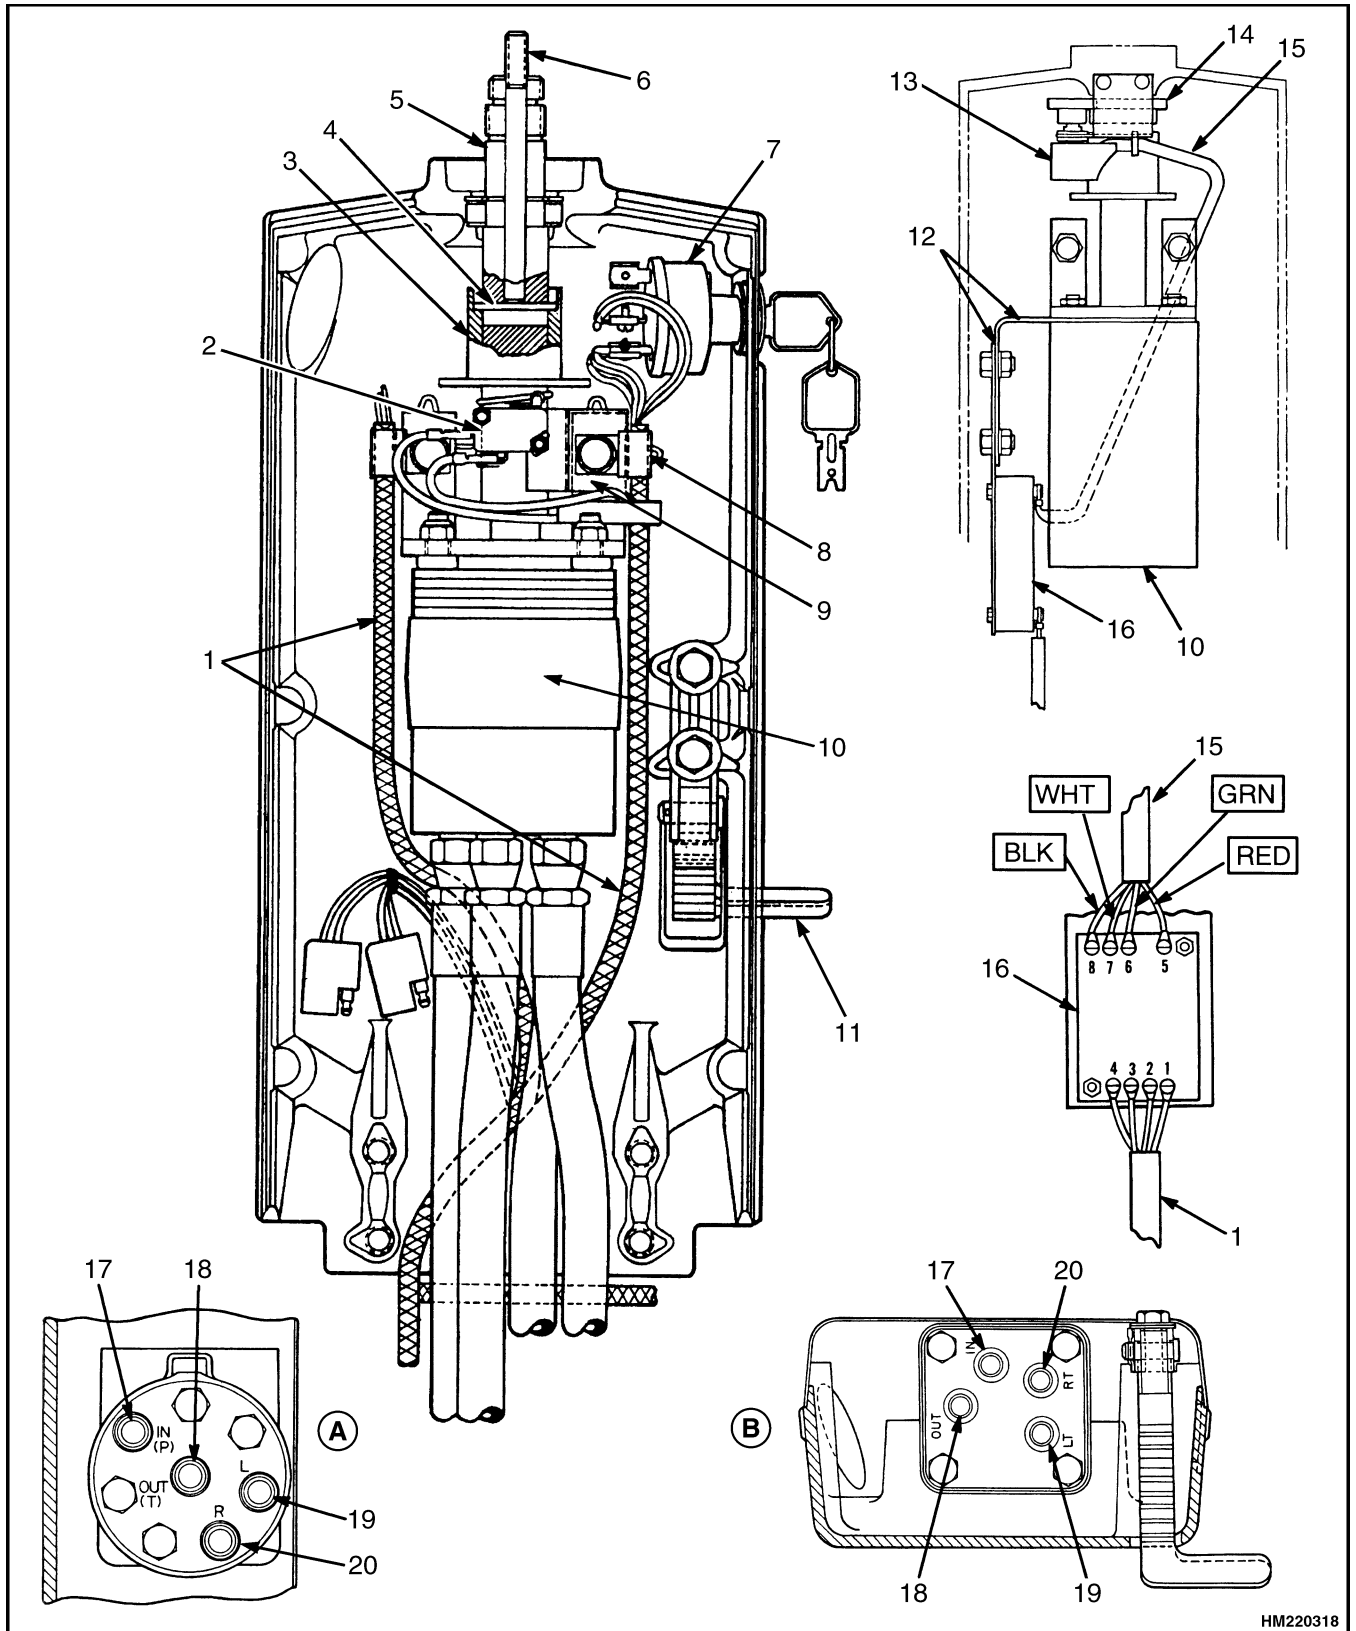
Steering Wheel and Steering Column Assembly (Early XL Units)
